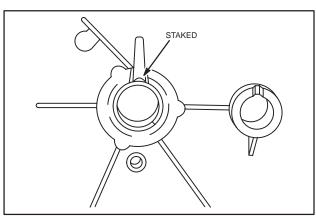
STAKING BEARING MODEL SERIES 6B, 8B, 60000, 80000, 90000, 100200, 100900, 110000, 120000, 130000 CYLINDER OR CRANKCASE COVER
